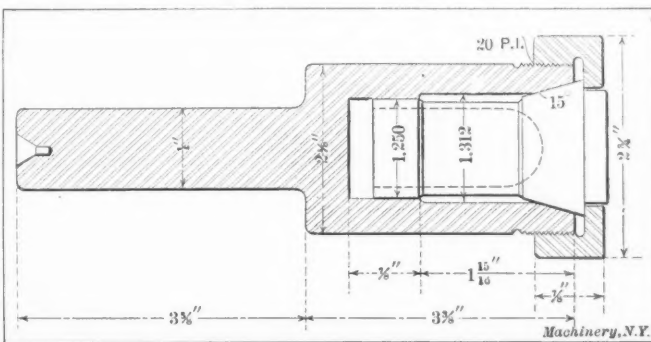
Holder for Grinding No. 1 Brown &amp; Sharpe Screw Machine Collets
